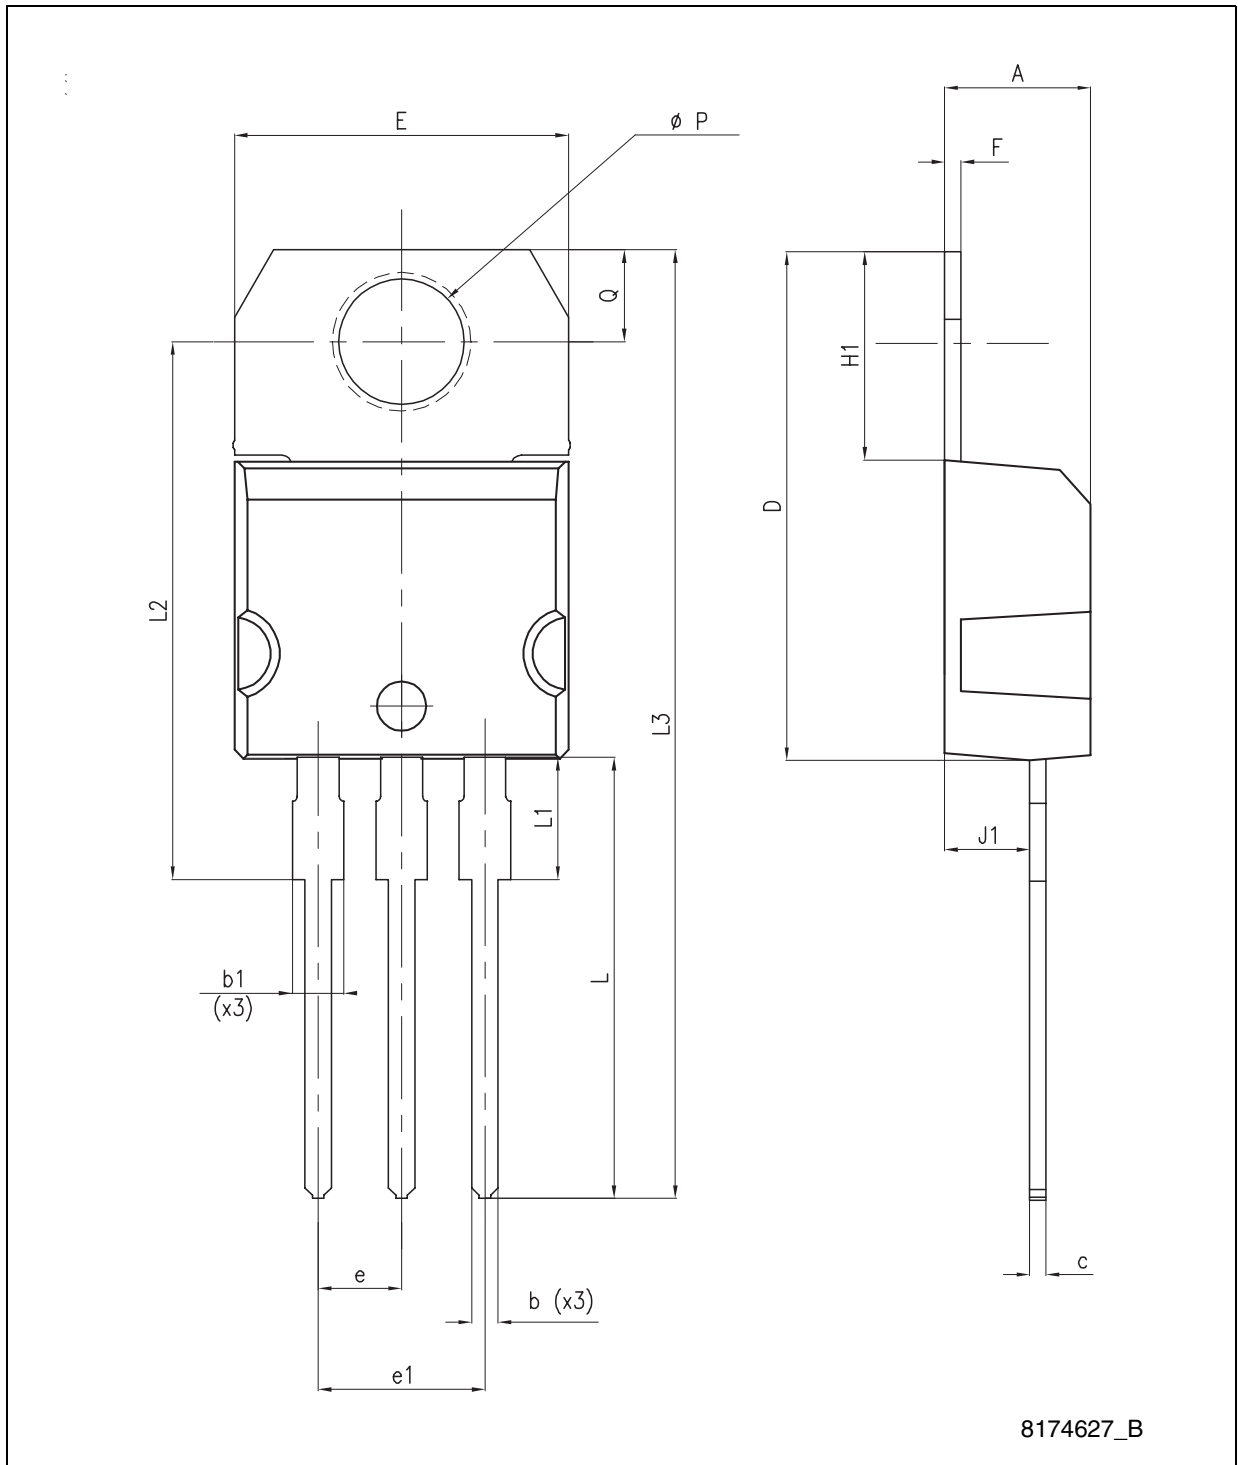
Drawing dimension TO-220 (type STD-ST Dual Gauge)
